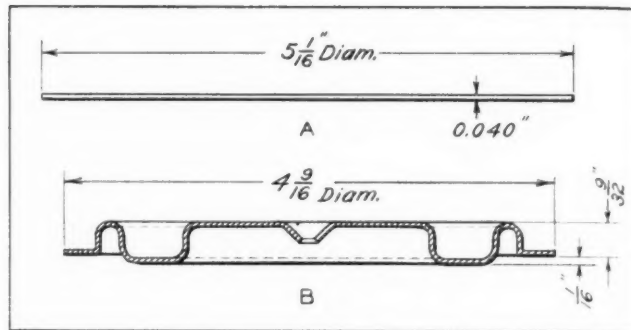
Copper Disk before and after Forming and Piercing in Die Shown in Fig. 2
